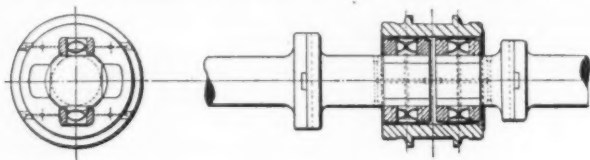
BRITISH MILL UNIVERSAL COUPLING
